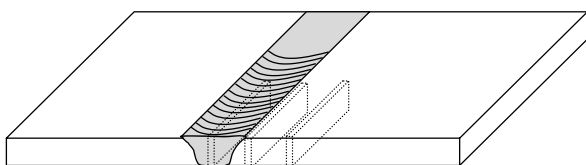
Location for cutting TEM specimens from the 2013 FSW weld.
